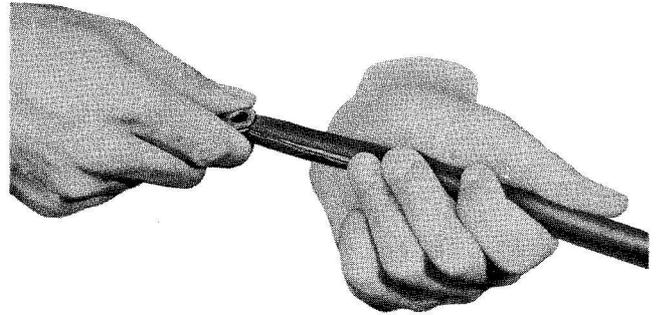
Stripping IW Cable (with Jacket-Splitting Cord)
